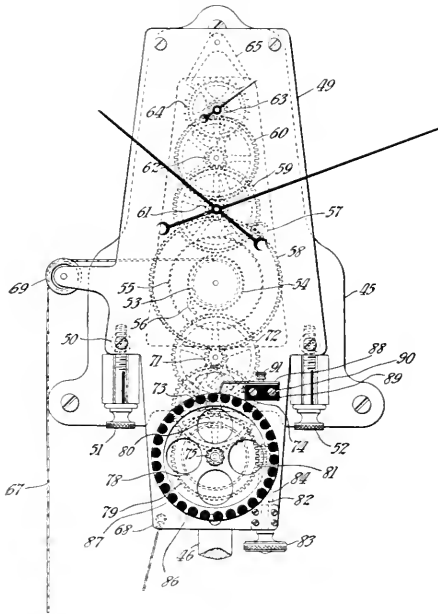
CONTACT MECHANISM OF SYNCHRONOUS TYPE.
